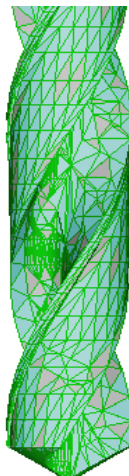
The mesh model of 118° point angle drill bit and workpiece.
